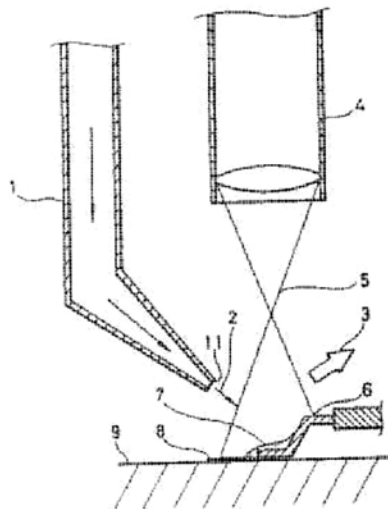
Laser welding apparatus describes of the patent system JP 2025271 A
